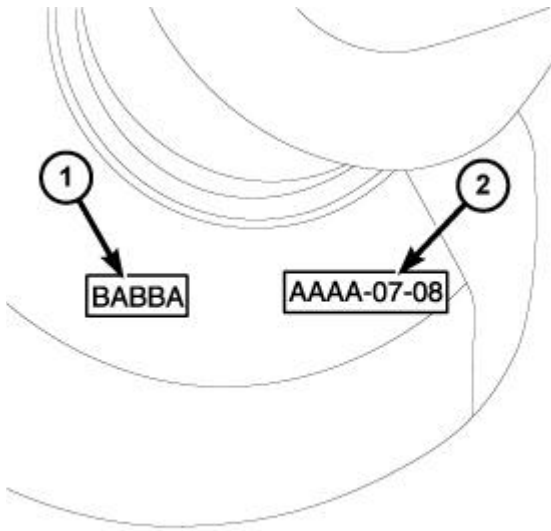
Crankshaft Bearing Size Mark & Crankshaft Bearing Assembly
